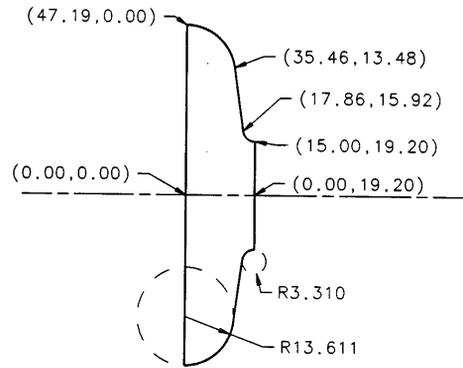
Geometry of the separator half cell. Dimensions in mm.
